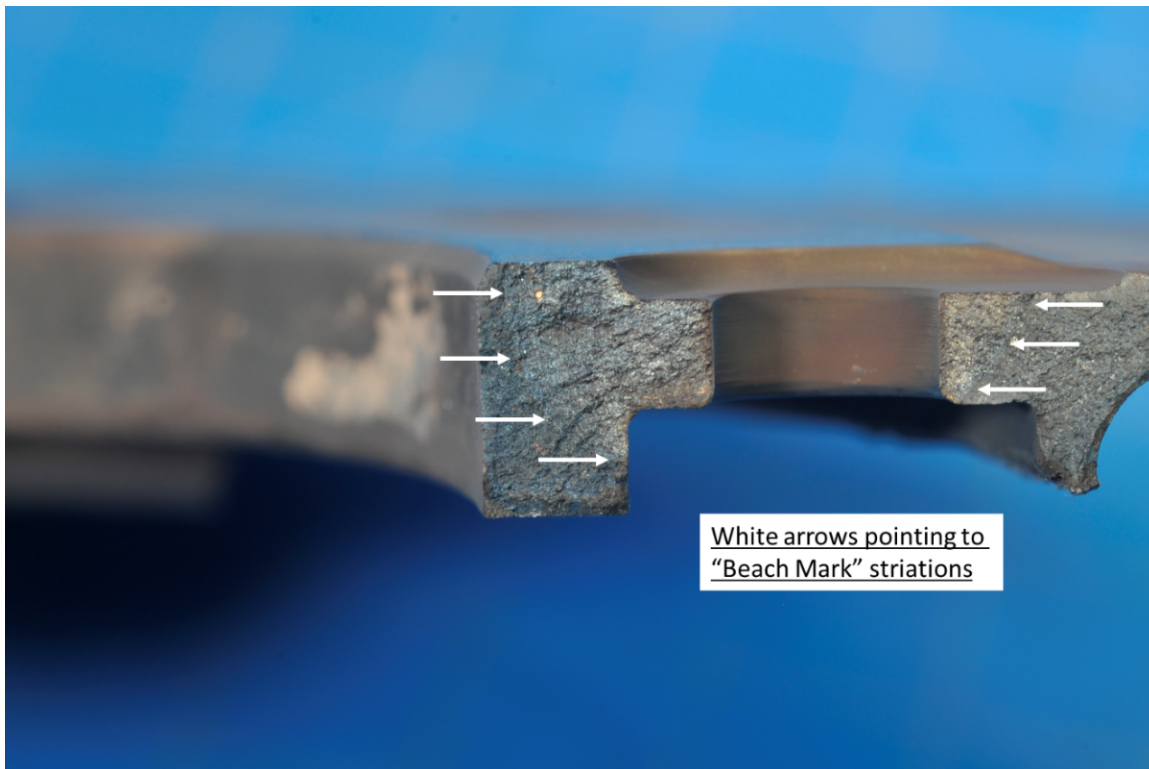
First Stage sealing disk, side view, showing beach mark striations. Photo courtesy of Honeywell Aerospace.
